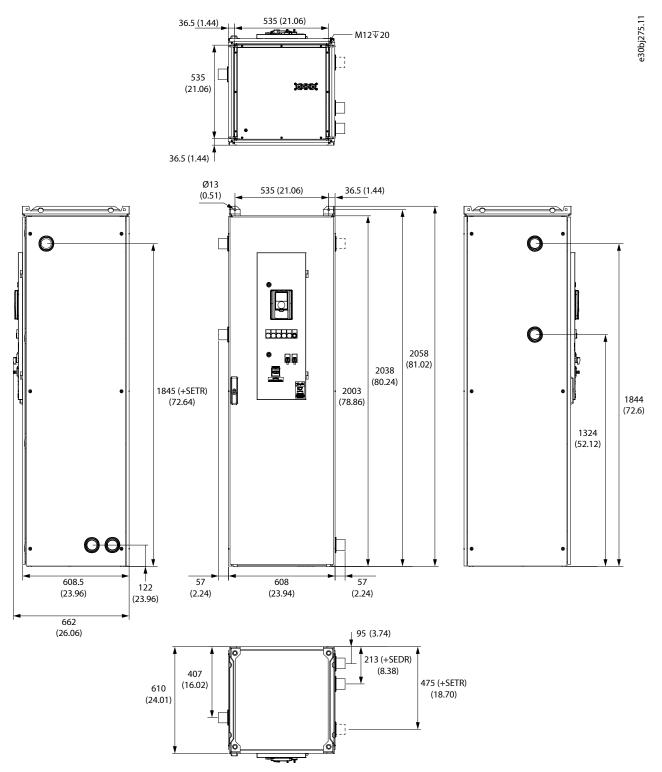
Dimensions of the Dual-pump Enclosed Cooling Module in mm (in), Drive Circuit Pipes on the Right
